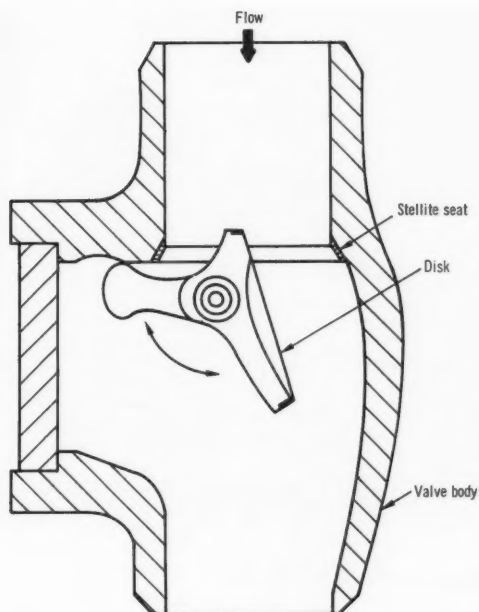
Check valve of the type used in the Fermi reactor.⁹
